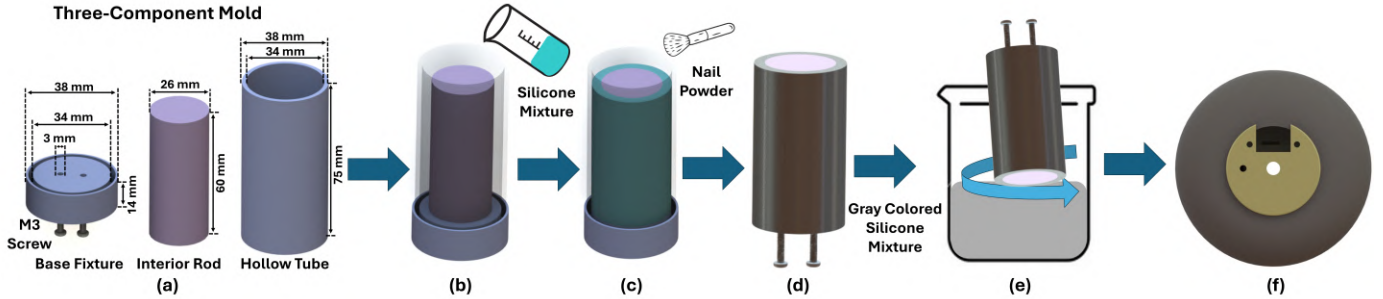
Fabrication process of the Tactile Sensing Balloon (TSB): (a) A three-component mold is assembled, consisting of a base fixture, an interior circular rod, and a hollow tube. (b) The mold surfaces are treated with a release agent to prevent adhesion. Then, an Ecoflex 00-30 silicone mixture is prepared by mixing Parts A and B in a 1:1 ratio and poured into the mold, filling the space between the hollow tube and the inner rod. (c) After curing at room temperature for 4–5 hours, the outer tube is removed, and reflective nail powder is applied to the silicone surface. (d) The reflective coating enhances the sensor’s sensitivity. (e) The coated silicone is then dipped into a gray-pigmented Ecoflex 00-30 mixture, prepared with black and white pigments, and rotated twice during dipping to ensure even coverage. (f) After the final curing stage, the torus-shaped TSB, now integrated with a ring-shaped frame, is ready to be attached to the gripper body.
